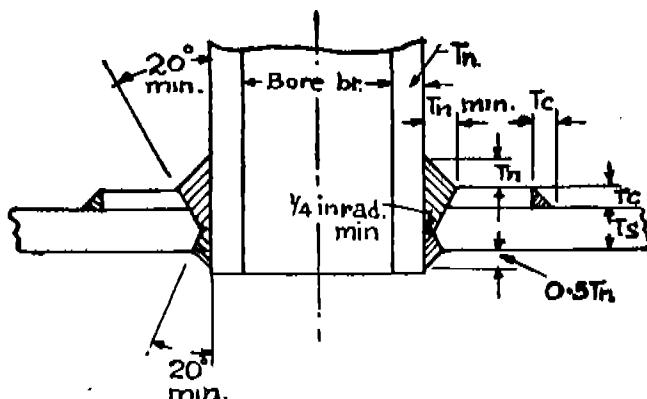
MINIMUM WELD ATTACHMENT FOR STANDPIPES OVER 5 IN BORE REQUIRING COMPENSATING PLATES.
